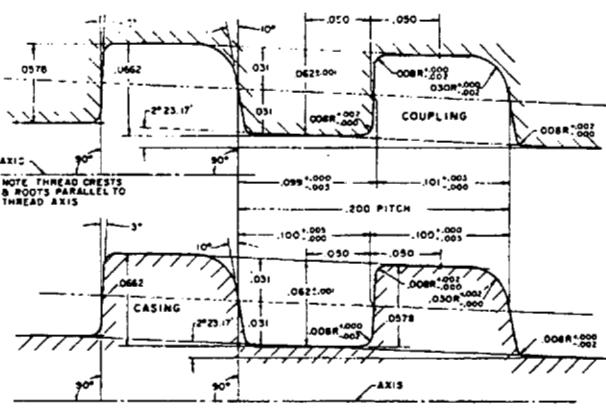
Buttress Casing Thread Form and Dimensions—For Casing Sizes 16 in. and Larger
